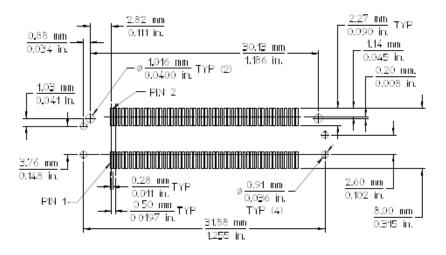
100-pin Samtec connector footprint and support shroud mounting hole dimensions
